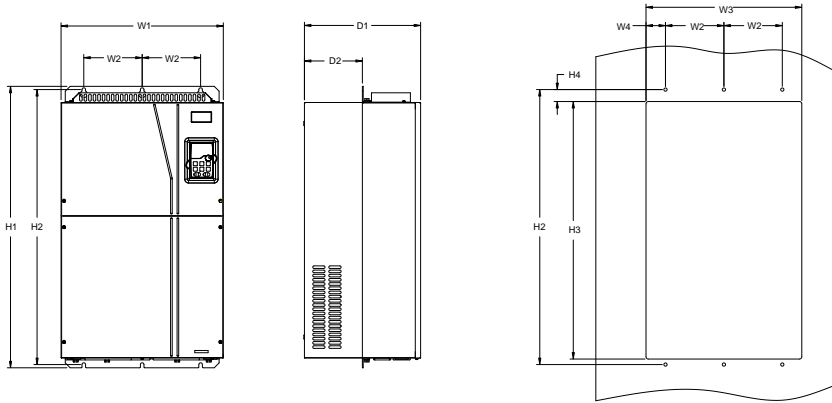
Flange mounting for 380V 132–200kW VFD models
